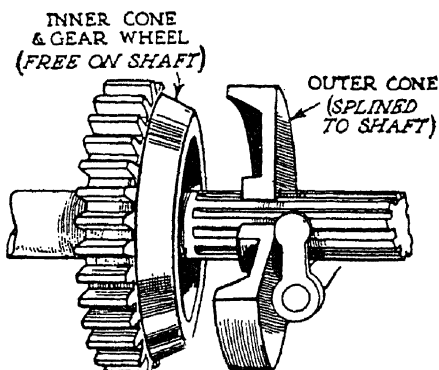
Showing how the Inner and Outer Cones are arranged to Lock the Gears to the Splined Shaft.
